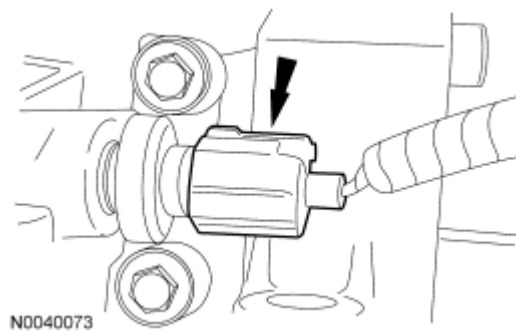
Locating Oil Pressure Sender Electrical Connector
